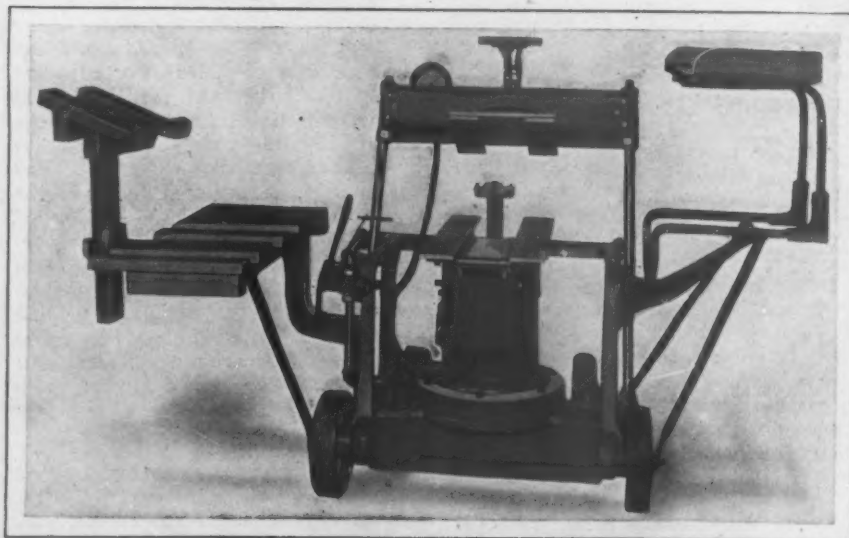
The No. 100 Combination Jolt Ramming and Squeezer Molding Machine Built by the Arcade Mfg. Company, Freeport, Ill.
